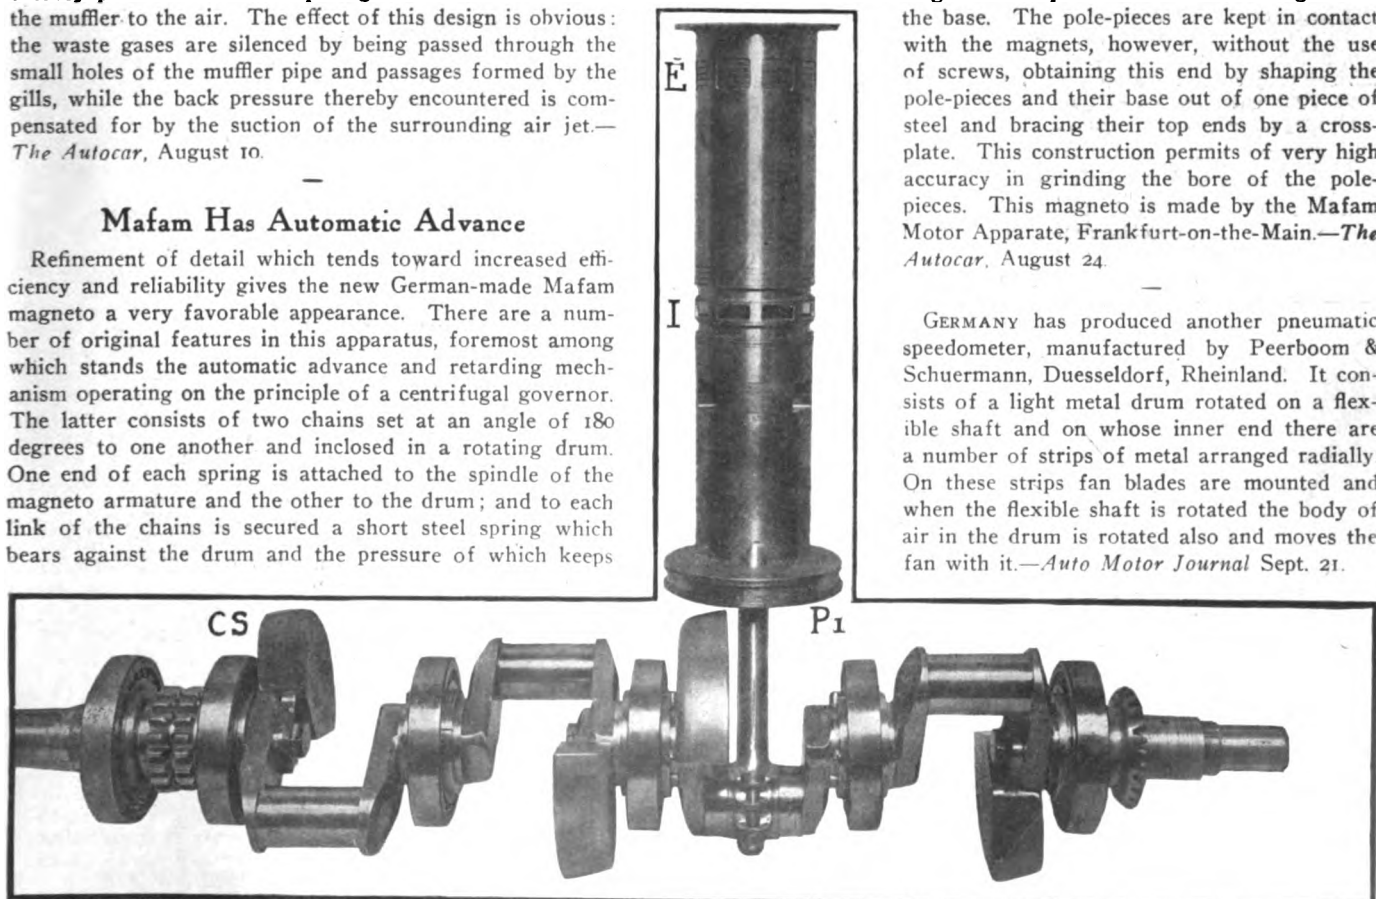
Six-bearing crankshaft used on the Koecklin two-cycle motor. Note counter-weights on cranks for balancing
